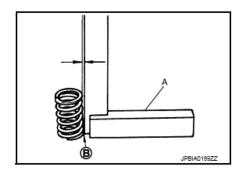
Measuring Maximum Clearance Between Top Of Spring And Try Square Courtesy of NISSAN MOTOR CO., U.S.A.
